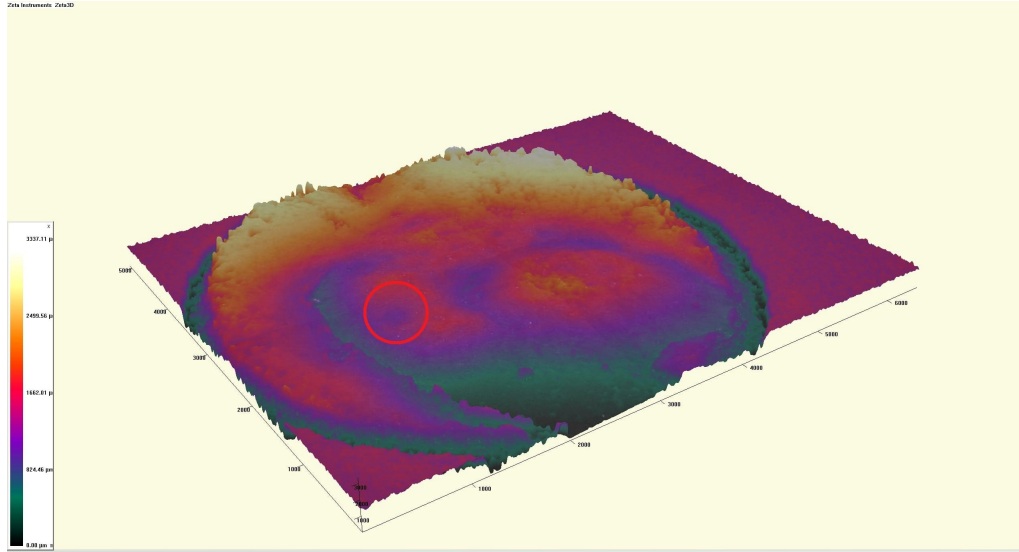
Pore zone selection from fracture surface of a 99.5% porosity, 100°C specimen.
